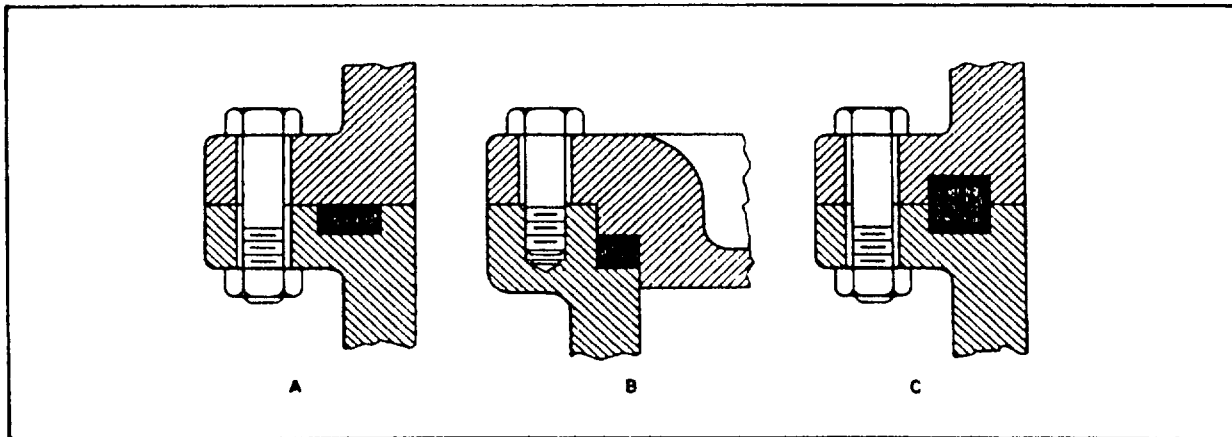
Use of Compressible Gaskets in Metal-to-Metal Joints
